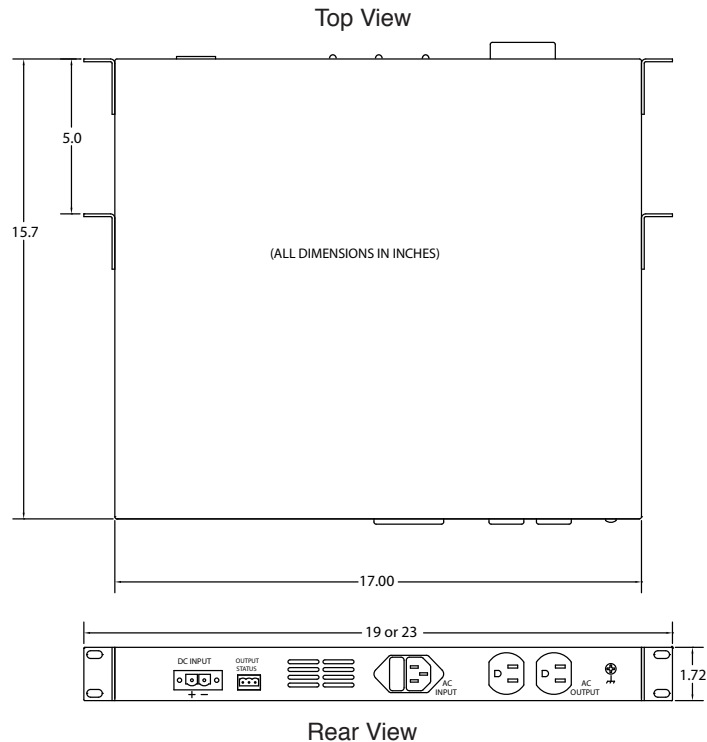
Overall dimensions. Inverter shown is U or L version.
